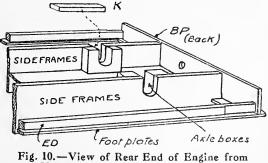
View of Rear End of Engine from Underside, showing Axleboxes, etc.
